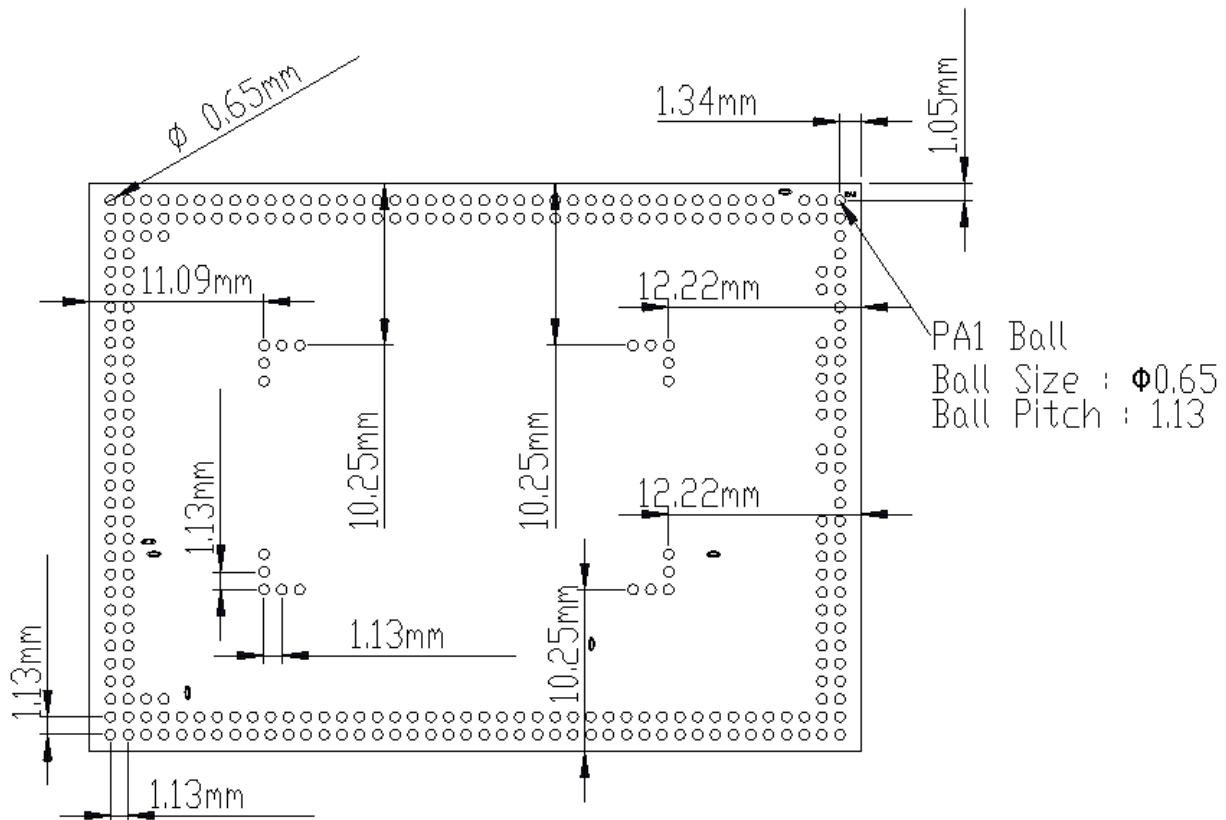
ARTIK 530/530s Module Mechanical Dimensions Bottom View
